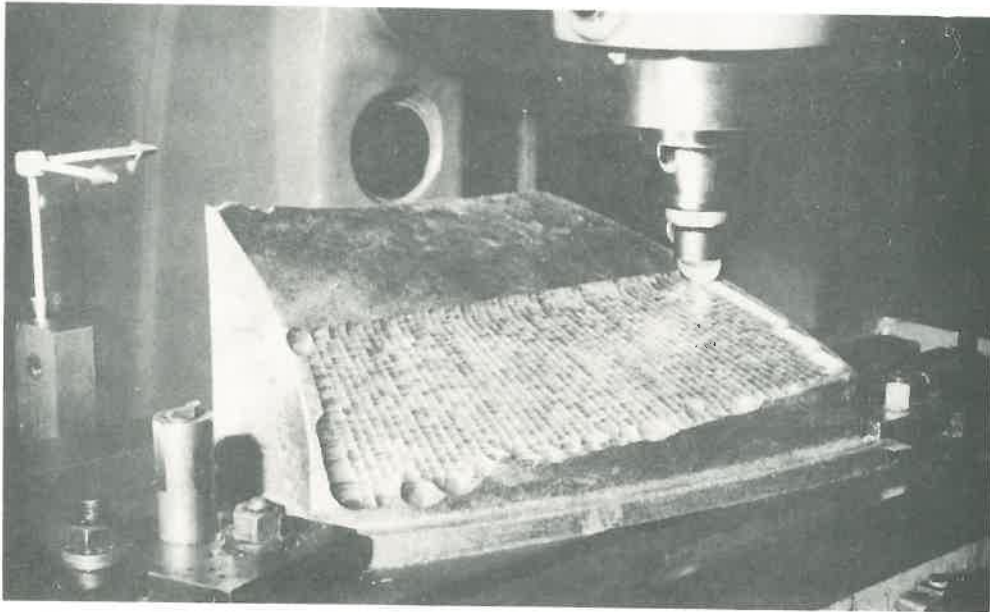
MACHINING MASTER TEMPLATES FOR IMPELLER.
